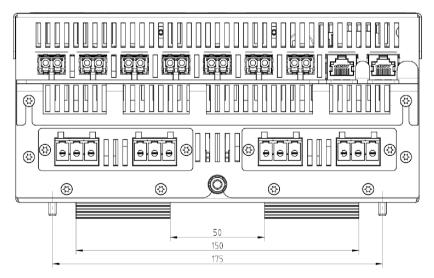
Dimension drawing IE Switch X302-7EEC - from above
